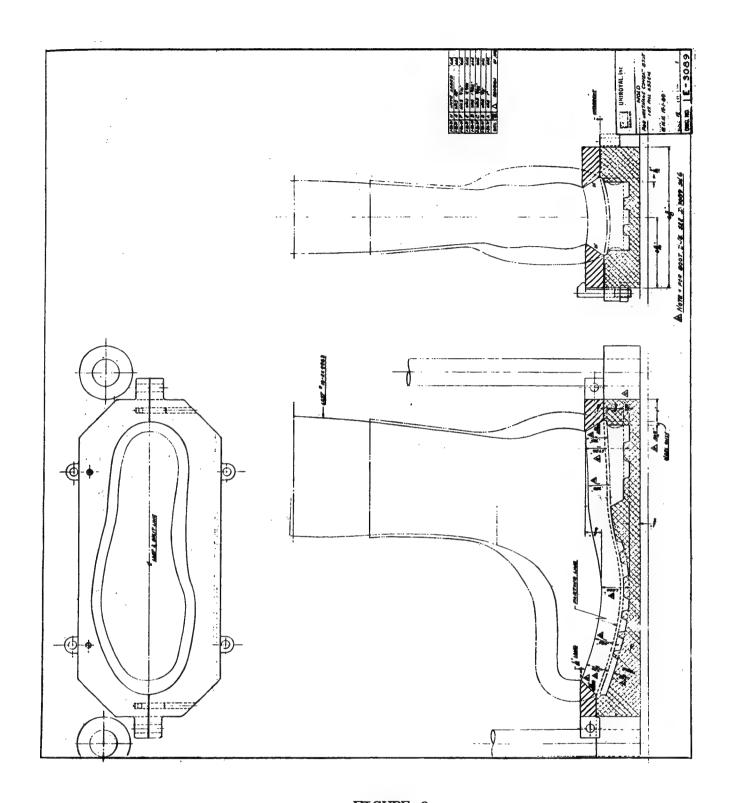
MOLD FOR SECOND FILL ASSEMBLY E 3089-2
